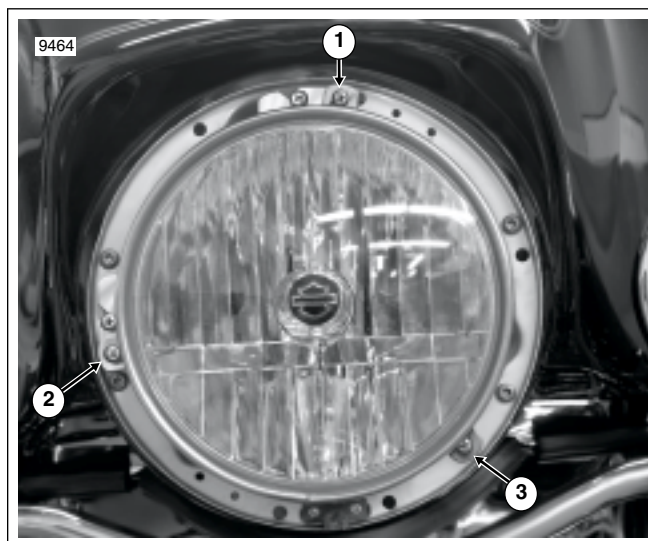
Remove Retaining Ring Screws (FLHX, FLHT/C/U Model Shown)
